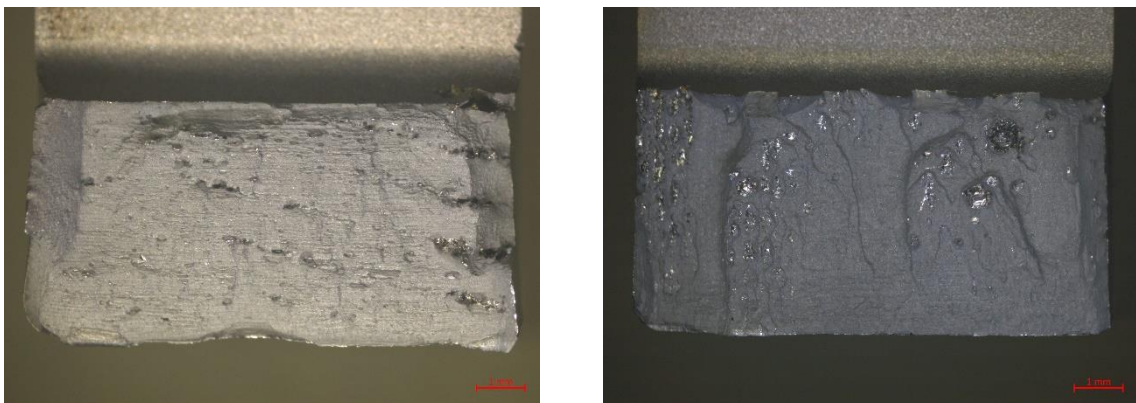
L-40 broken Charpy sample (fracture surface) – left 45° build angle, right 90° build angle
